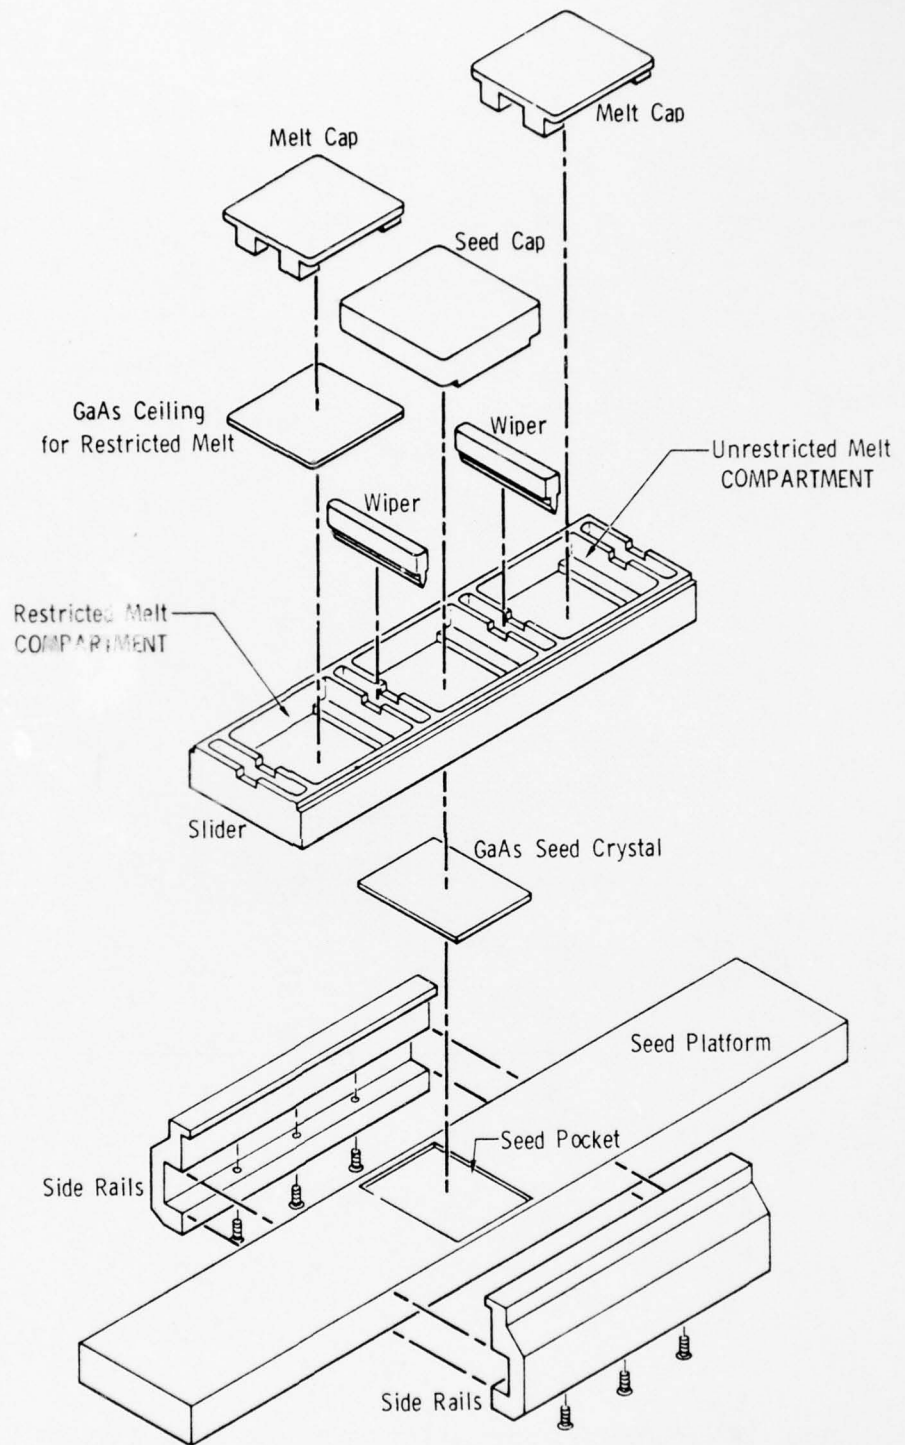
Exploded view of LPE GaAs boat incorporating a restricted and unrestricted melt
